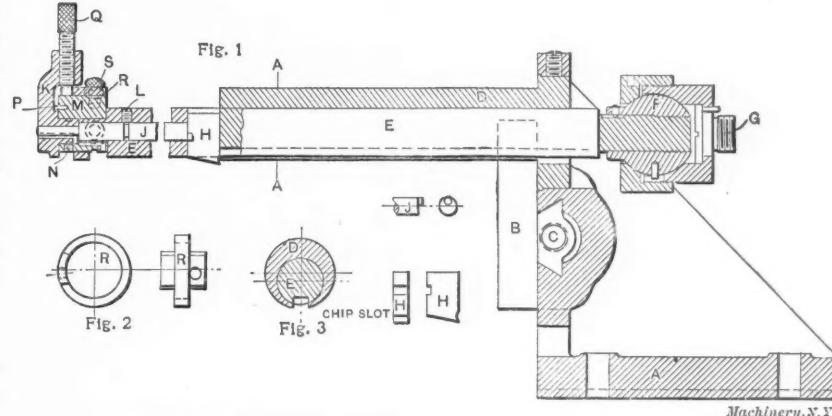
Section through Cutter-bar of Key-seating Attachment.
